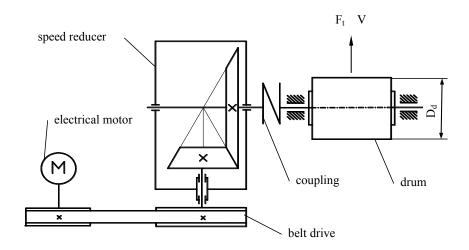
Fig D. Design a belt conveyor mechanical drive. If turning force Ft, peripheral speed V at well as diameter of sprockets D_d are given (Table A).
